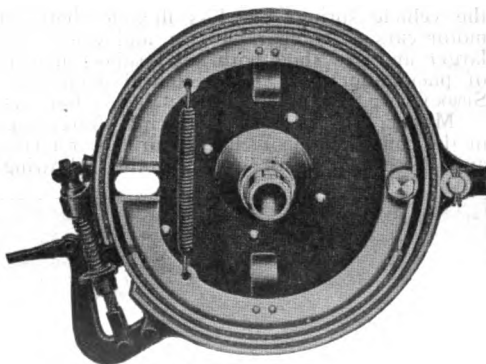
Brake drum with service brake interiorly and emergency brake exteriorly.
